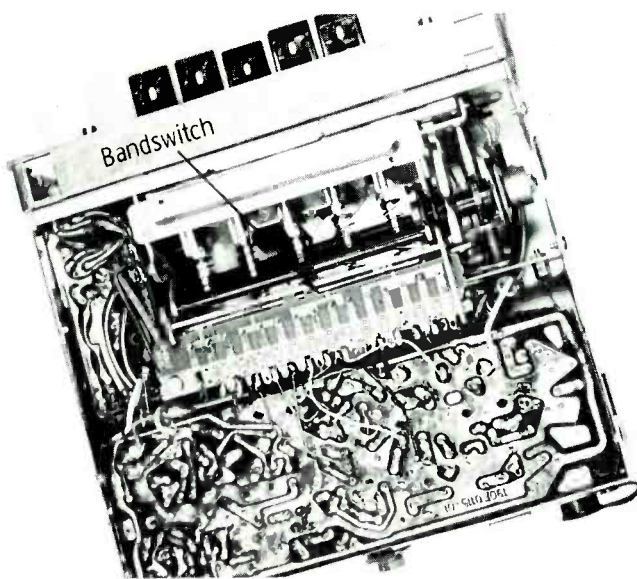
Bottom view of the Becker Europa AM/FM receiver showing the bandswitch and the main printed-circuit board.
